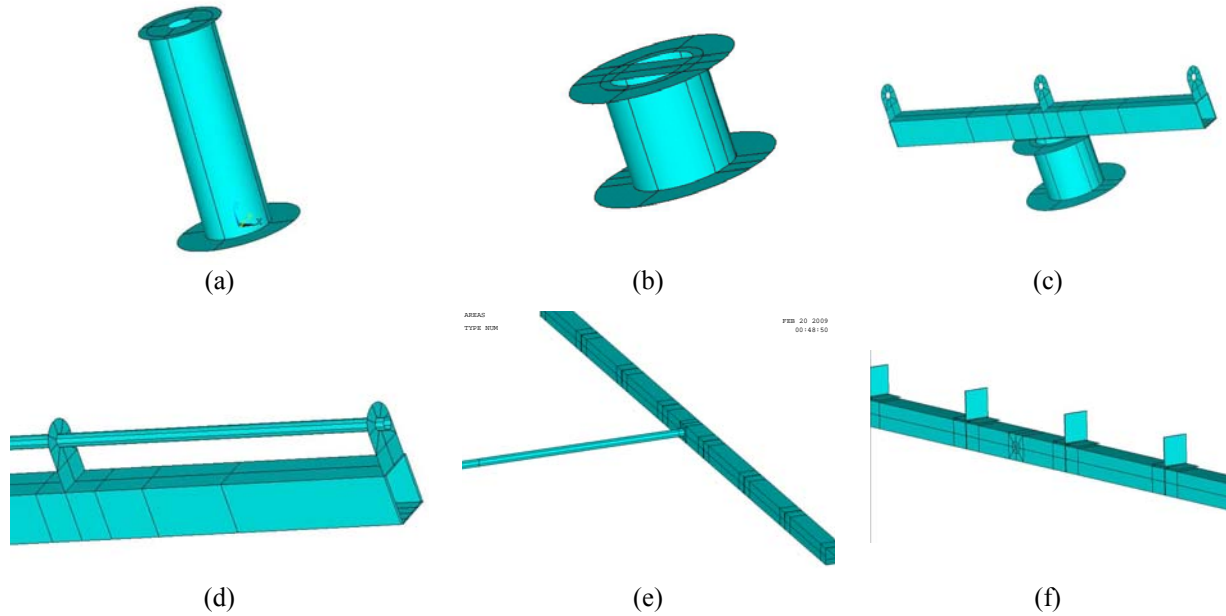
Surface division necessary for creating a mapped mesh: (a) cylindrical base, (b) cylindrical body, (c) assembly of the cross beam, (d) detail of the driving shaft mounting, (e) driving shaft-RHS beam joint, and (f) beam with pairs for C-channel mounting plates.
